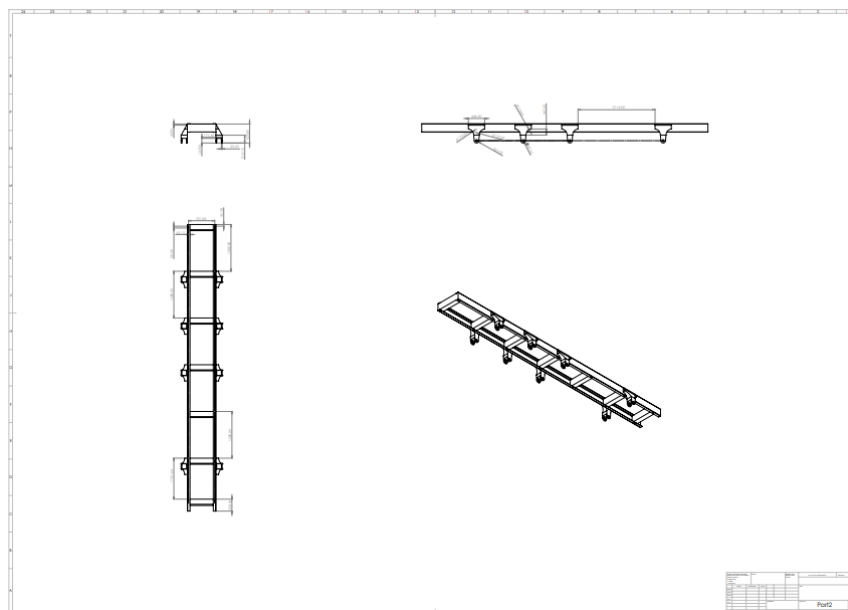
Draft Sheet of Axle Support & Final 2D Design
